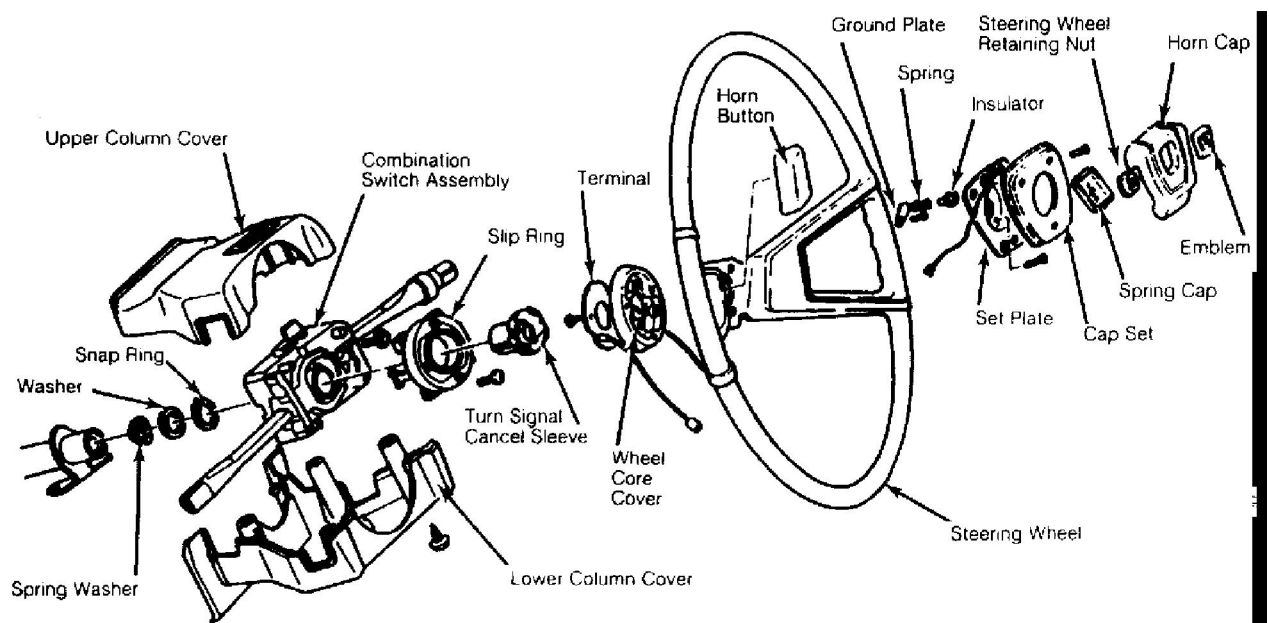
Exploded View of Typical Steering Wheel Assembly
